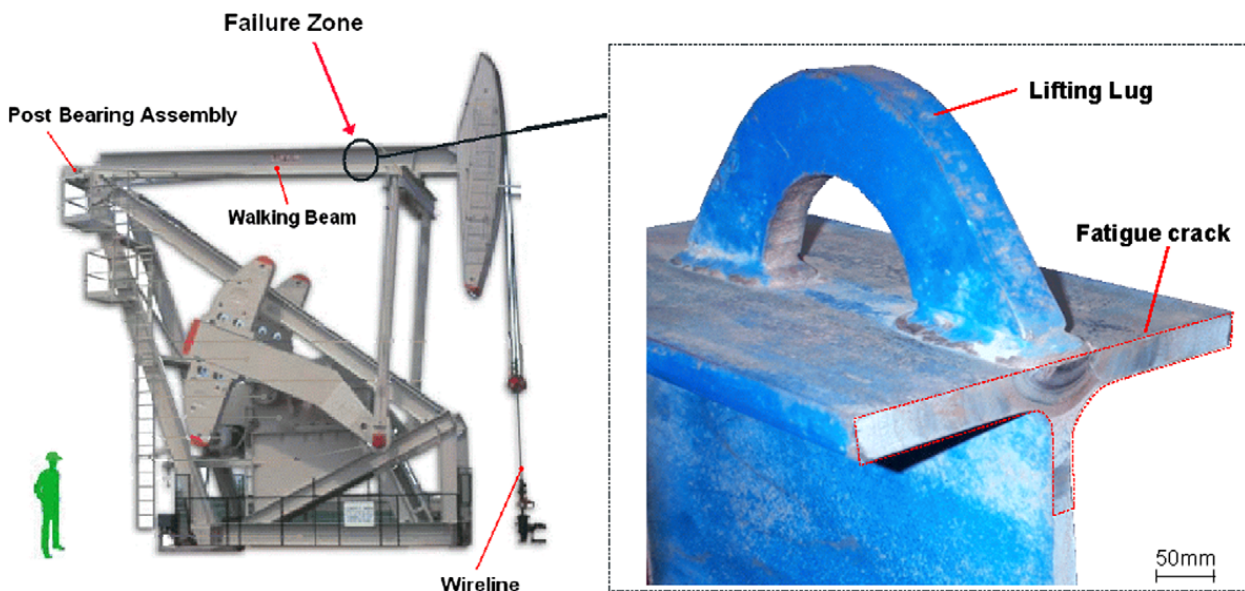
Oilfield pumping unit scheme and failed section detail.
